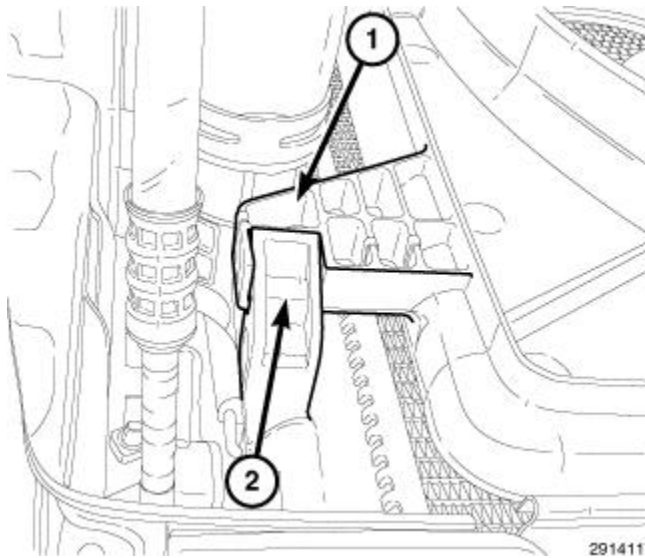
Radiator Cooling Fan Assembly & Radiator Mounts
